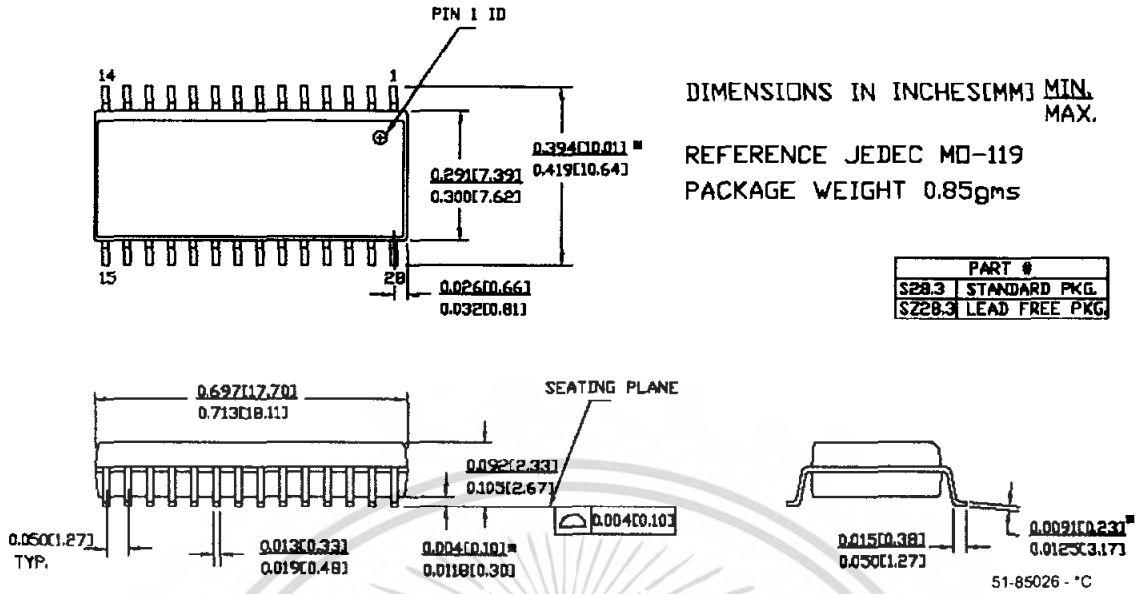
28-Lead (300-Mil) Molded SOIC
